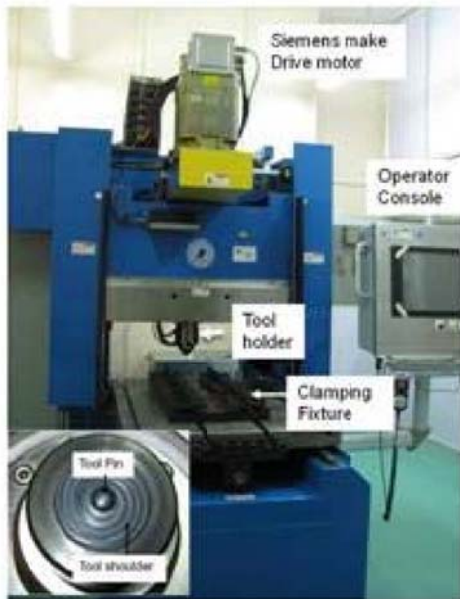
Picture of the equipment used for FSS (picture at the inset is the FSS tool)
